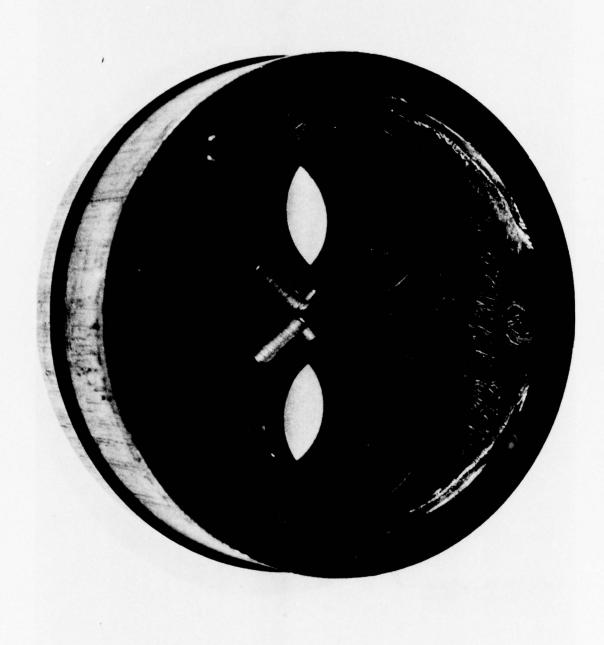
Supply Pump Rear Bearing Assembly Package No. 2
